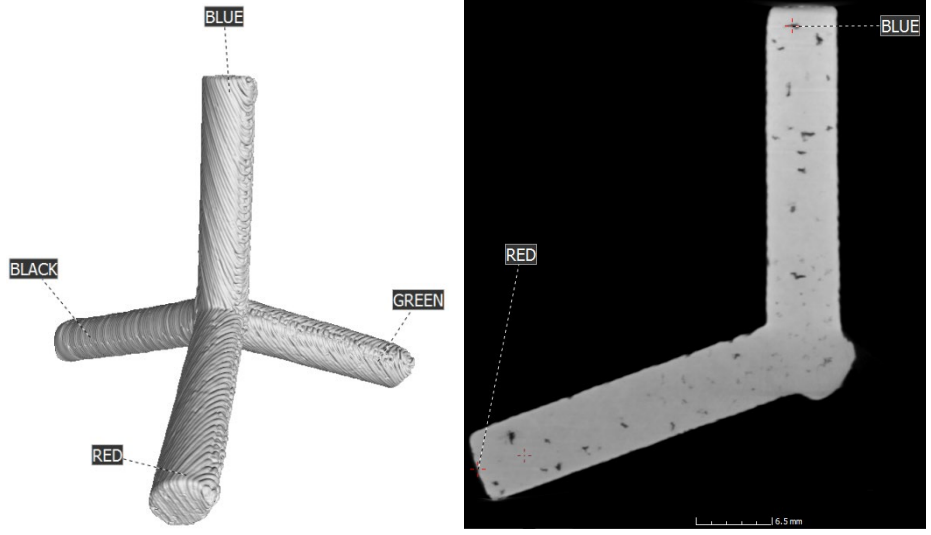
3-D solid and 2-D planar images of second tetrahedral cast Al specimen in second set
